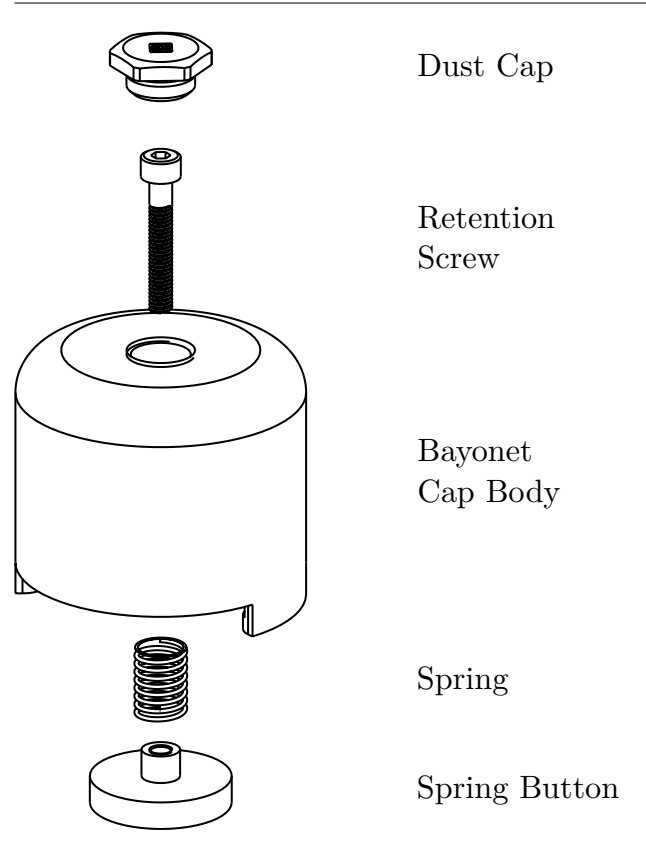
Exploded view of the Bayonet Cap, showing the major components.
